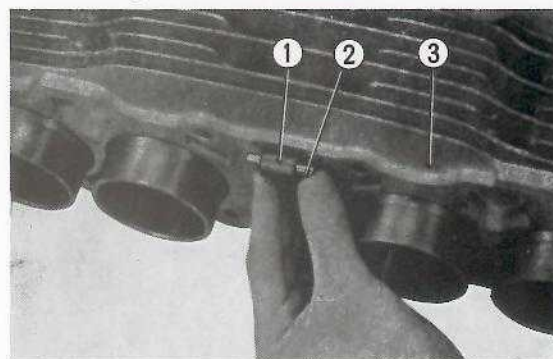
① Cam chain guide ③ Cylinder
